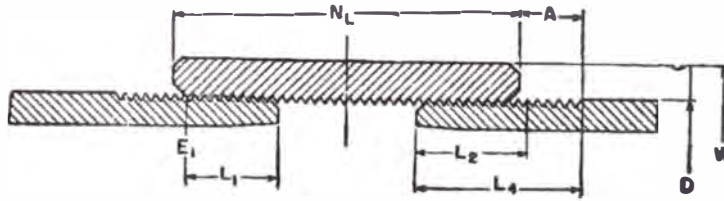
Dimensions of Hand Tight Assembly for Use with Table X3.1
